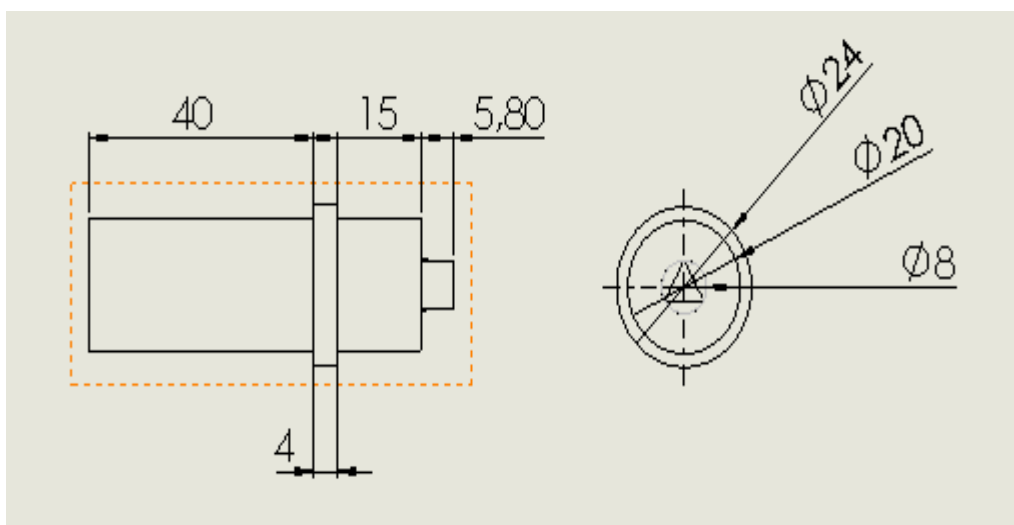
(c) Designed FSW/FSP tool AutoCAD version.
